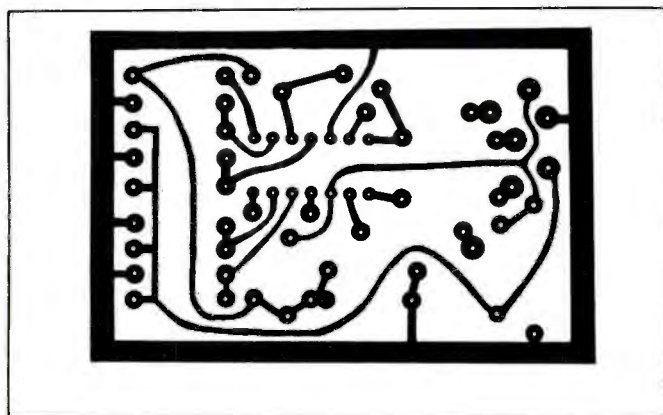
Actual-size etching-and-drilling guide for fabricating a printed-circuit board for the project.
